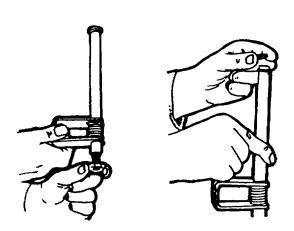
Fitting Seal Rings to Push Rod Tube
